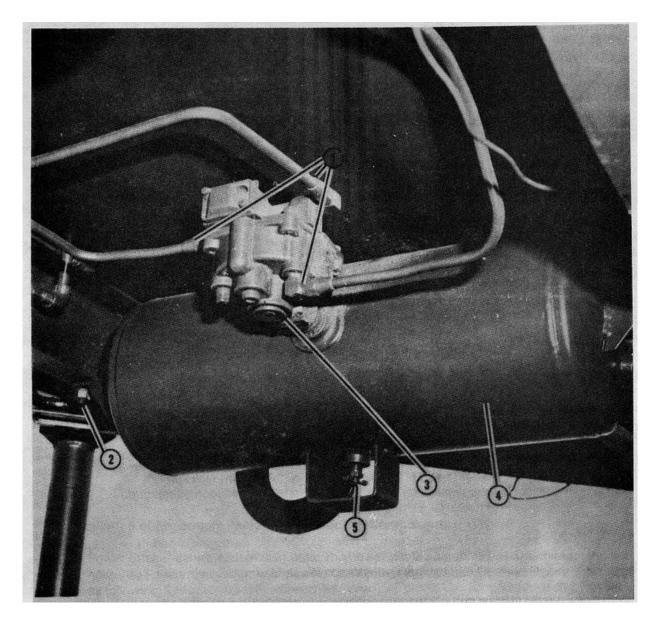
AIR TANK & RELAY VALVE MOUNTING
